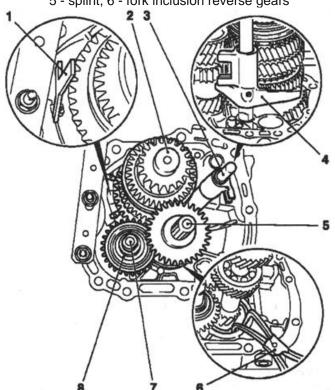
Removing the components of the switching mechanism reverse gears:
